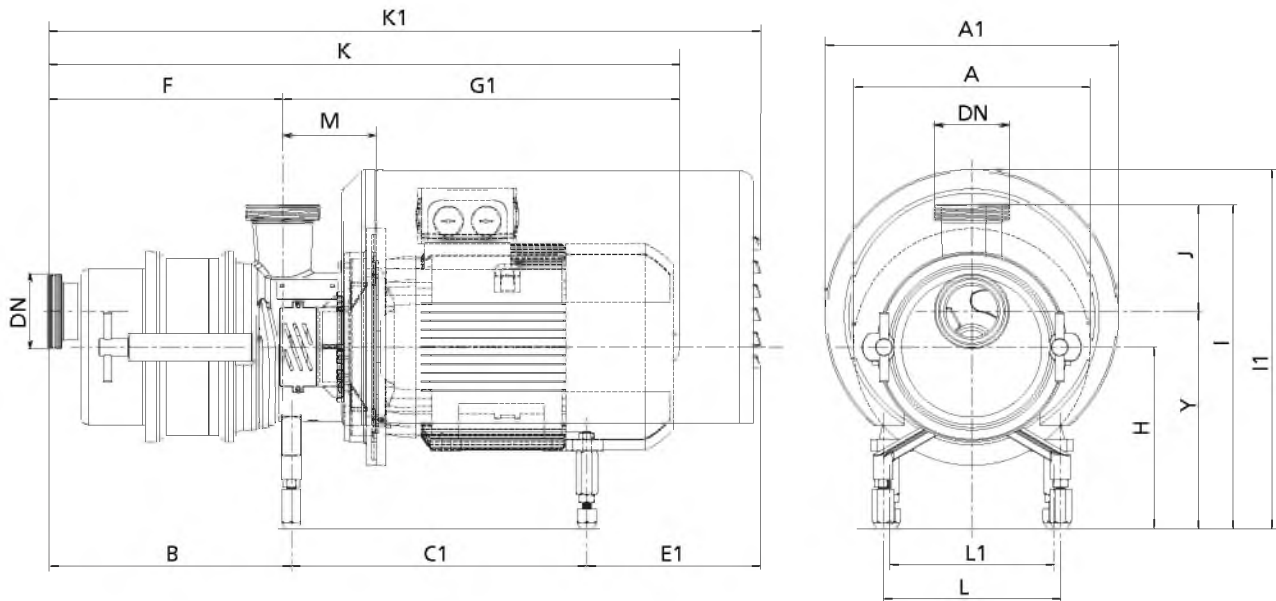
Pump set with motor shroud, on 4-point ball feet
